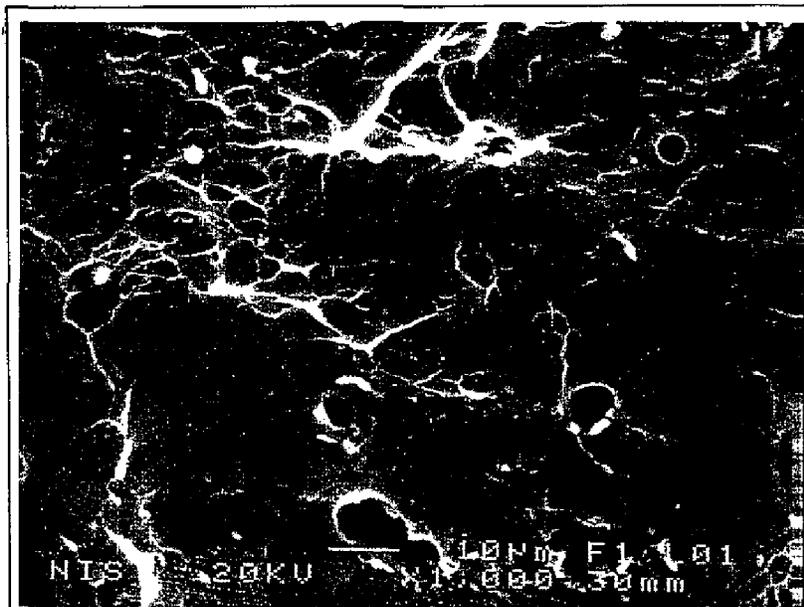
FRACTURE SURFACE OF THE SHOULDER OF THE RUPTURED CYLINDER THAT SHOWS SUSTAINED-LOAD-CRACKING (MAG. 1000X) -- ITEM 3A
